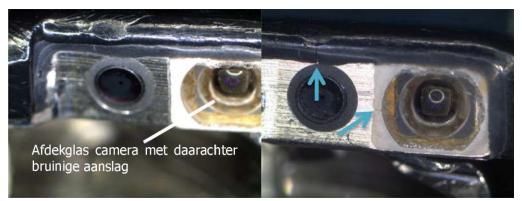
Visual inspection camera housing. On the left and right, it is clearly visible that the scale is located behind the glass covering of the camera. On the right, a vertical arrow points to the tear in de sealing of the housing. Furthermore, on the right another tear can be seen in de sealing of the camera which is indicated with the diagonal arrow.
